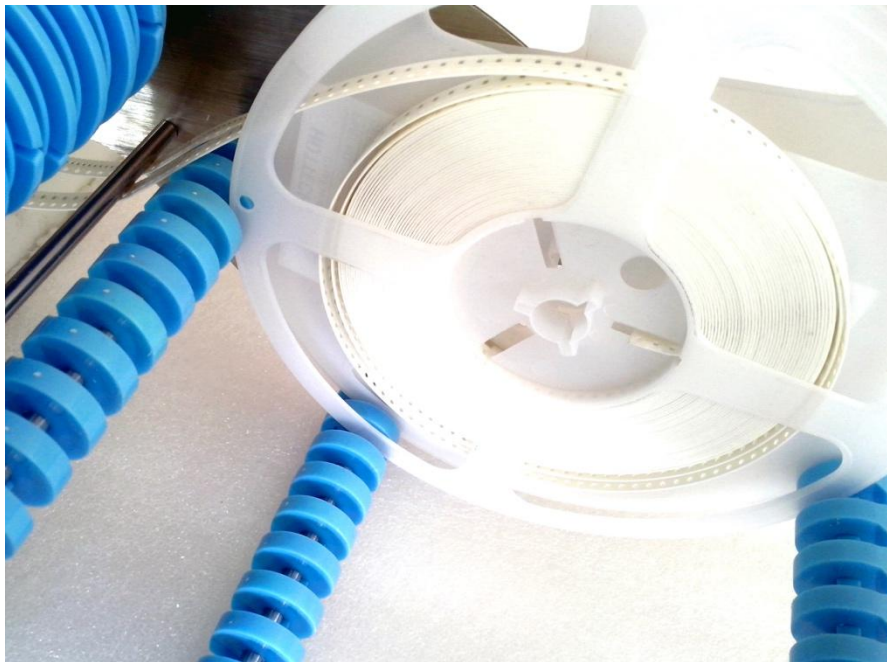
Image of tape reel on 3 disks, with tape threaded under rod.
